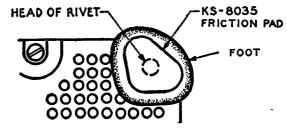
Base Plate with Foot and Friction Pad Assembled
